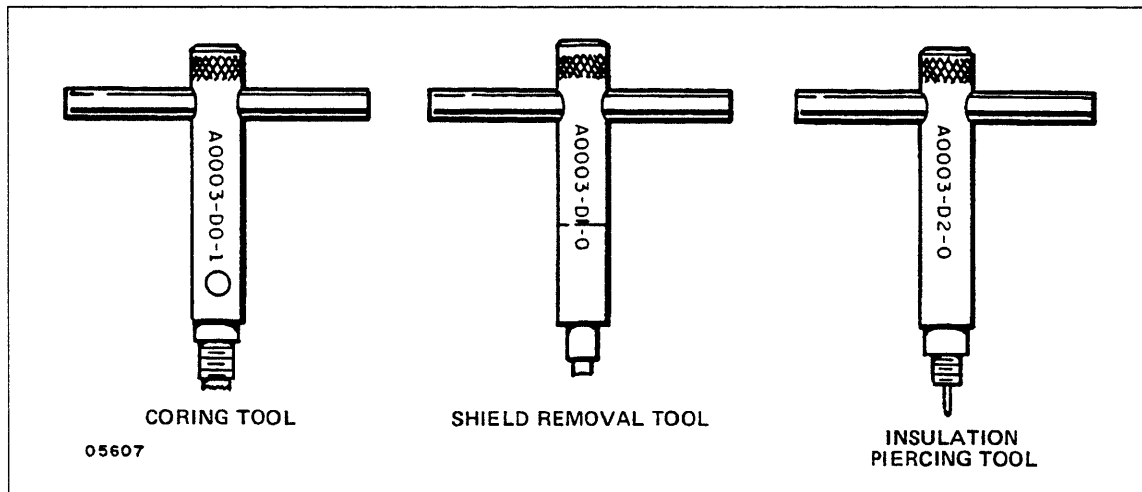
Cable-Tap Tool Kit for YA300A Tap Block
